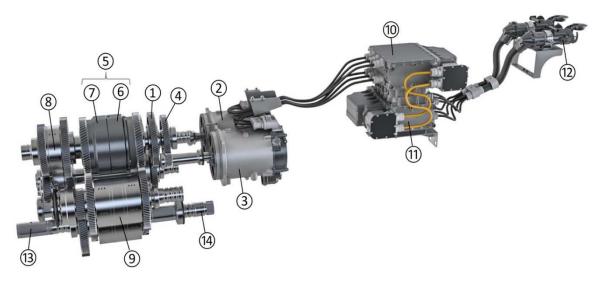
New eAutoPowr transmission of John Deere (① drive through and gear stage from diesel engine to MG1, ② first electric machine (MG1), ③ second electric machine (MG2), ④ gear stage from MG2 to double planetary gear, ⑤ double planetary gear, ⑥ "LO" planetary gear with sun and ring drive, ⑦ "HI" planetary gear with carrier and sun drive, ⑧ reversing circuit, ⑨ switching group module, ⑩ double inverter for MG1 and MG2, ⑪ double inverter for external attachments, ⑫ AEF-interfaces for coupling external attachments, ⑪ mechanical output front axle differential, ⑭ mechanical output Rear axle differential)
